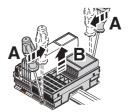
Removing the bus coupler Figure 7-8 Removing an I/O module
